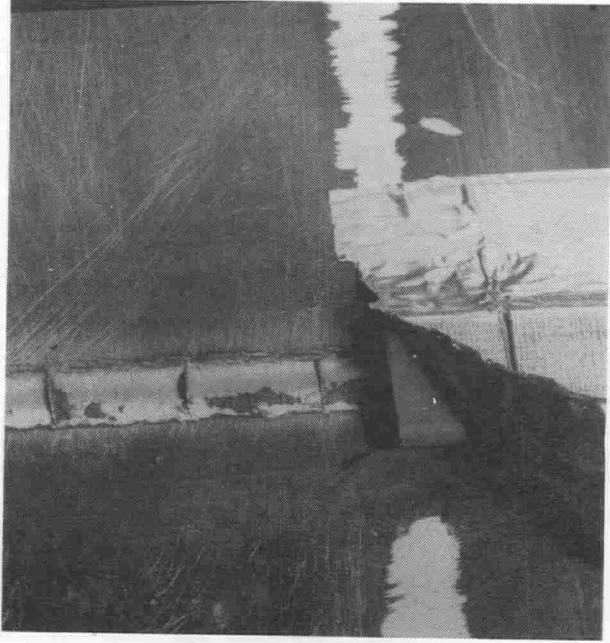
The ceramic backing strip is partly taken away after welding
